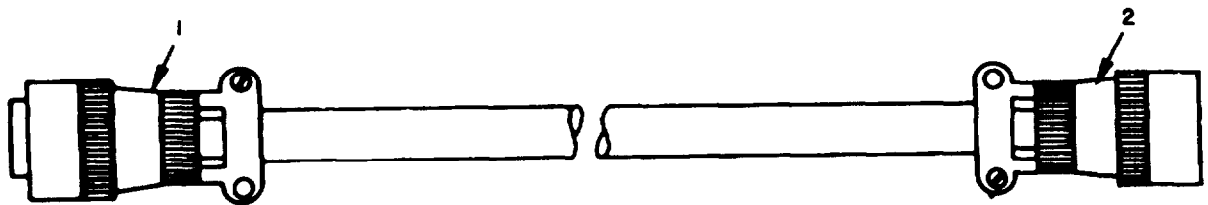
Cable Assembly, Special Purpose CX-10570/U (W1).
